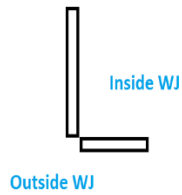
L shaped formed by two plates. With a welding joint on the inside of the L and outside.
